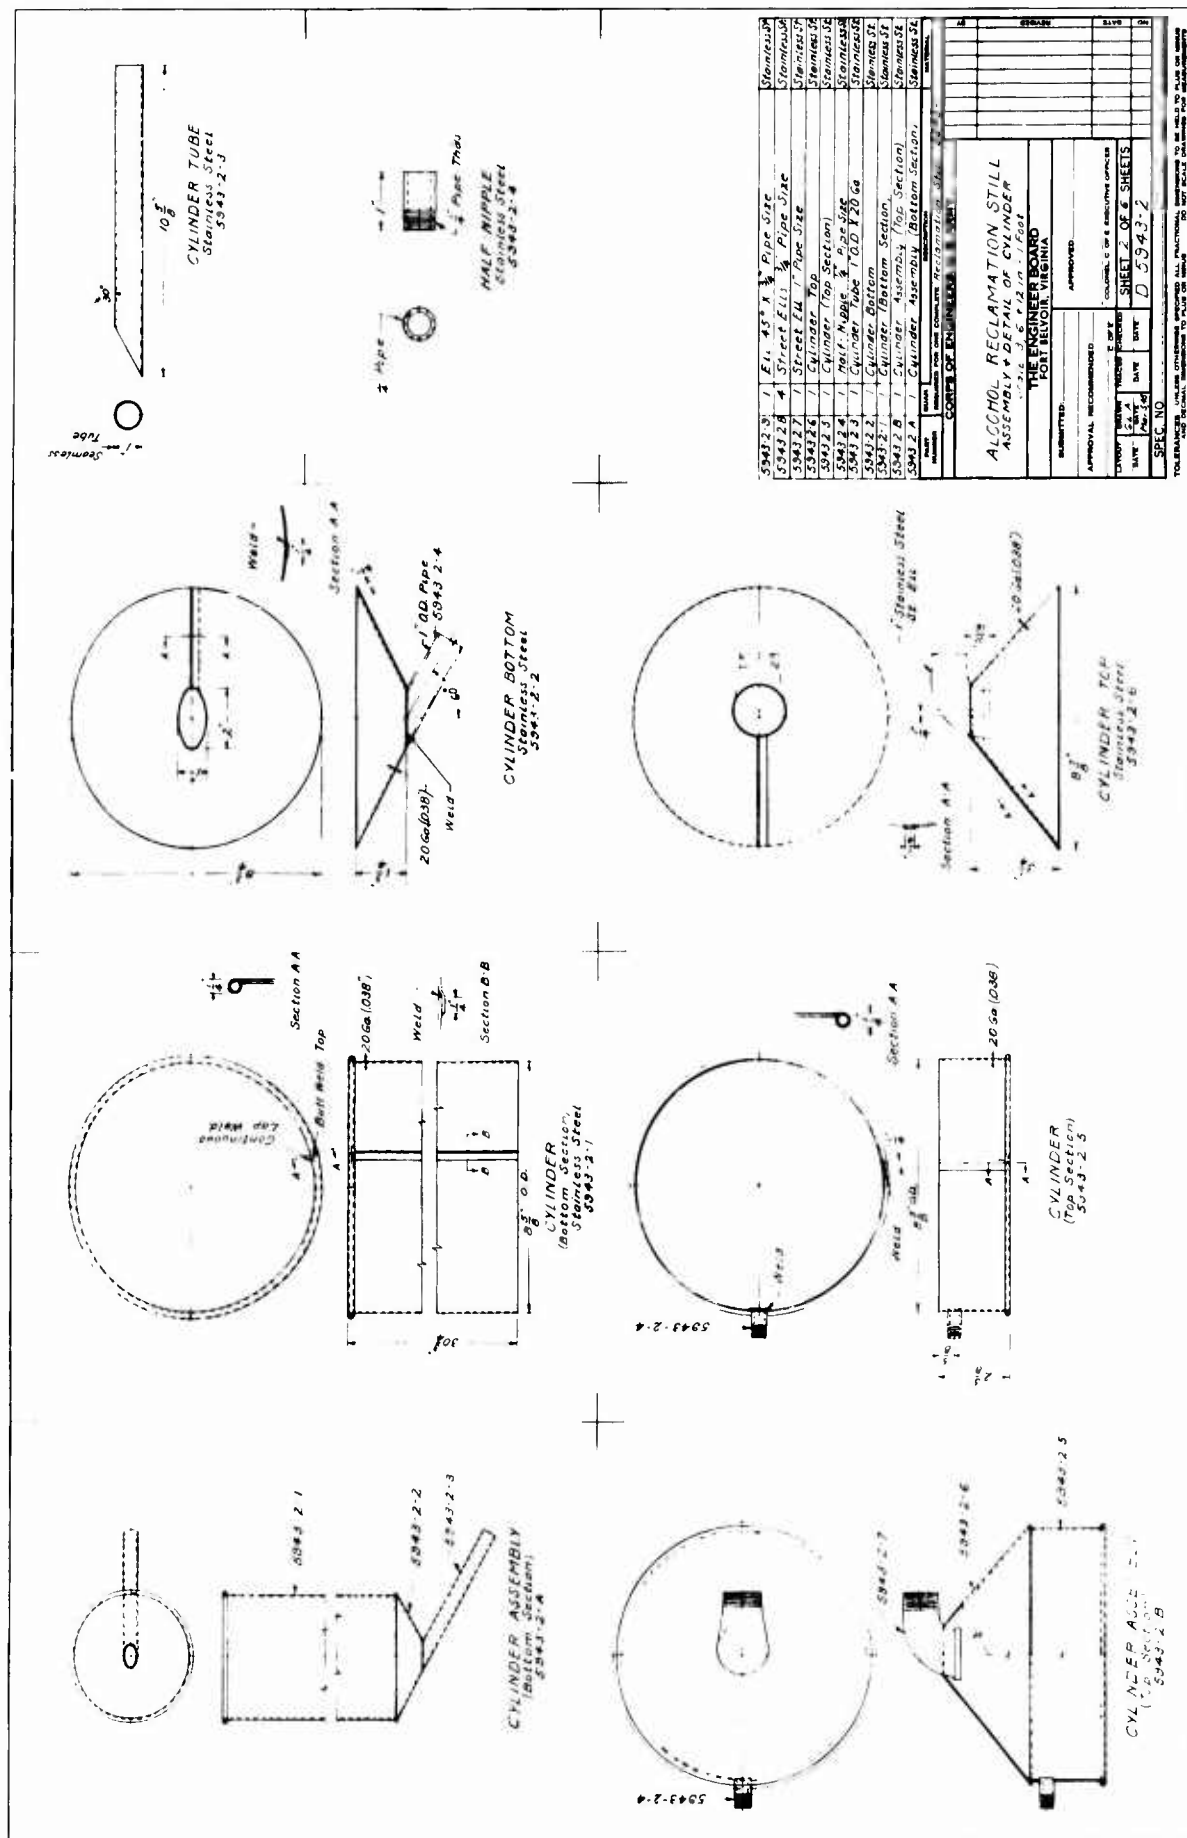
PLAN, ELEVATION, DETAIL, ALCOHOL RECLAMATION STILL
